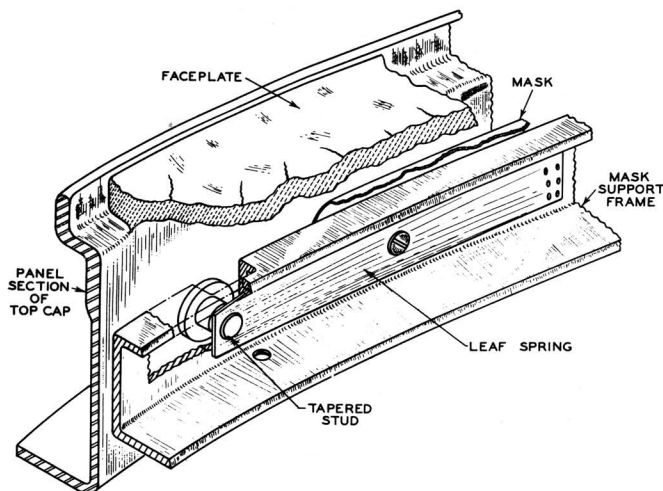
Method used for mounting shadow-mask support frame in top cap.
